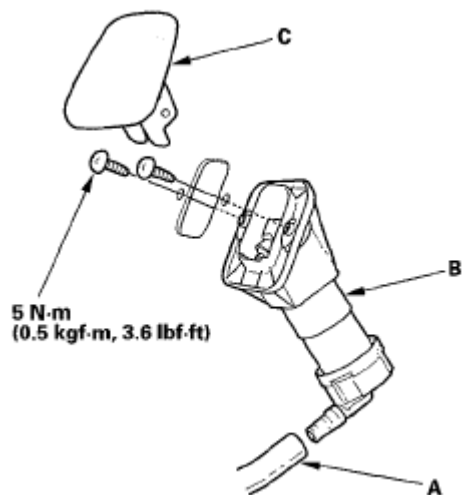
Identifying Headlight Washer Tube From Headlight Washer Nozzle With Torque Specification
